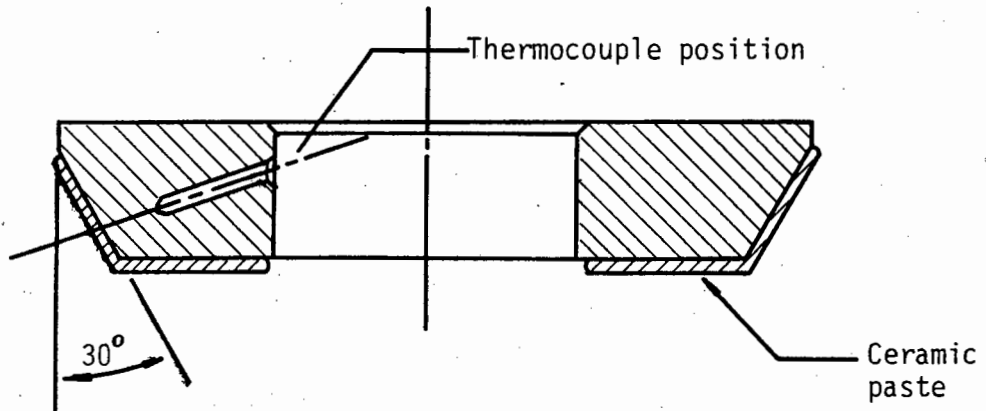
Valve poppet illustrating surface coated in ceramic paste and the location of the thermocouple.
